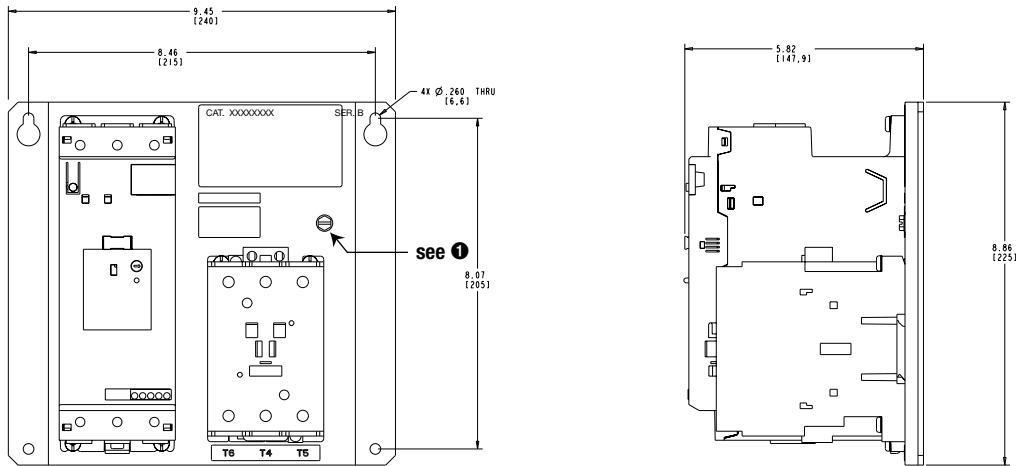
Panel Dimensions for 32, 51, and 64 Amp Elevator Panels
